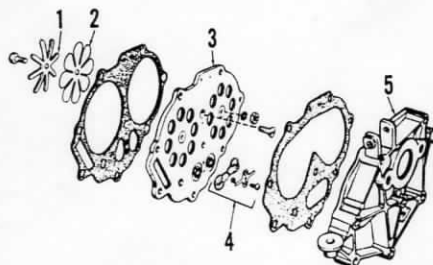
Exploded view of leaf (reed) valve assembly. Check valve (4) is used only on models with pressurized fuel tank Fig. OM7-7.
